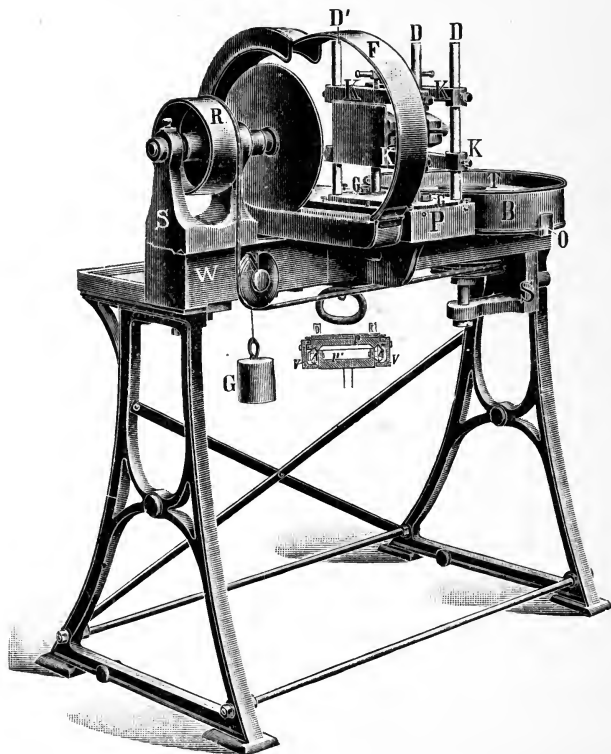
Steeg and Reuter's Motor-driven Crystal Cutting and Grinding Machine.
